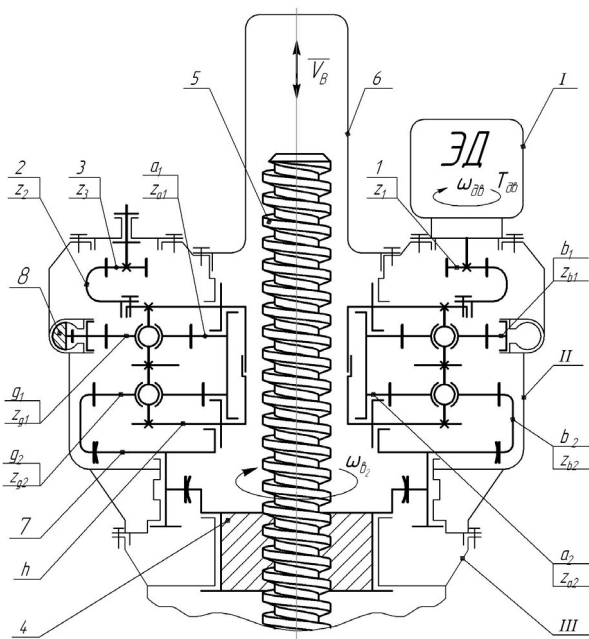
Kinematical scheme of a new multi-turn electric drive of isolation valve of pipeline transport with multi-threaded power transmission and parallel positioned axes of engine rotor and valve spindle:
